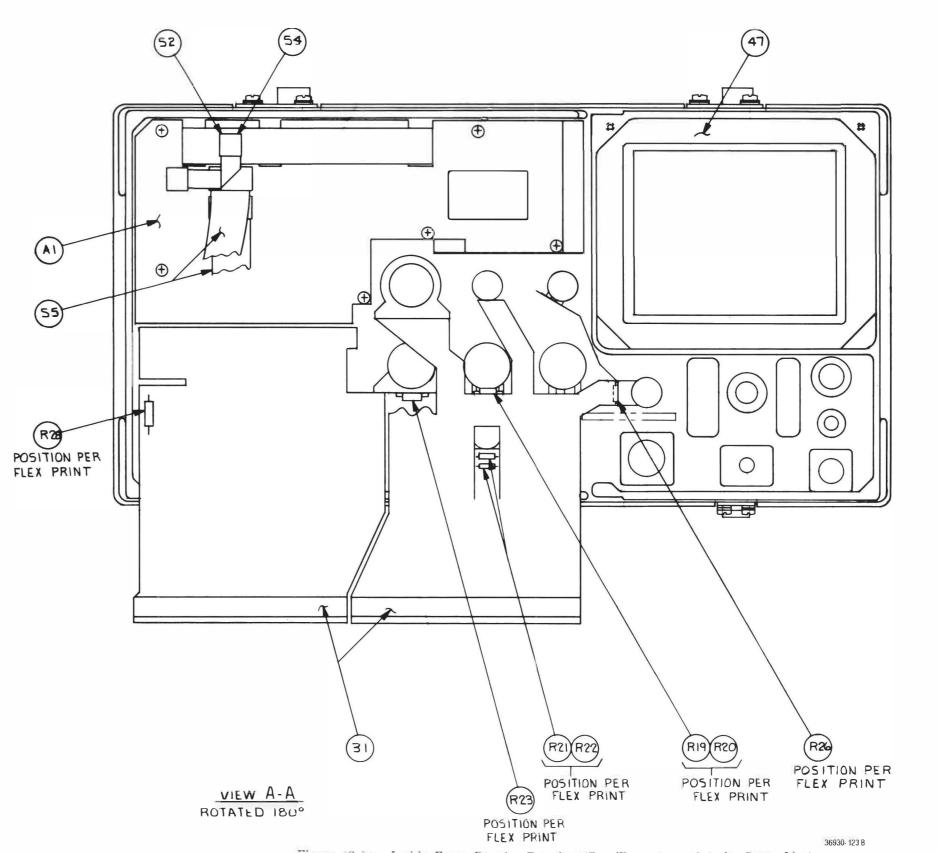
Inside Front Panel - Drawing (See Sheet 4, p. 18-9, for Parts List)
